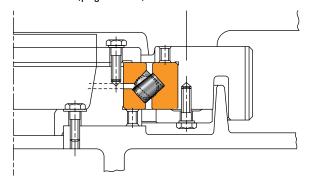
Typical mounting arrangement of a TXRDO bearing.
